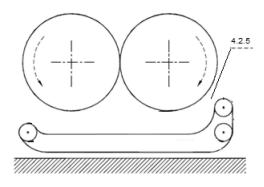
Location of mechanical hazards on a two roll mill with retractable ploughs
